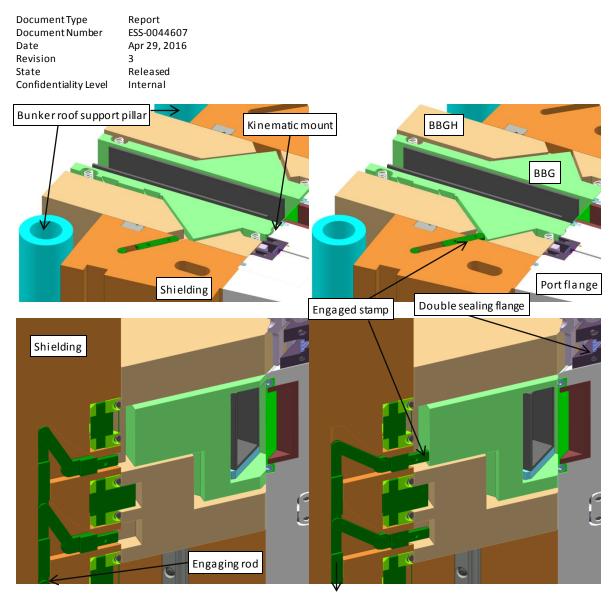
Horizontal cross-section (top pictures), upper moderator level, showing engaging the BBG by stamp linkage. Left: disengaged. Right: engaged. Notice the subtle, 5mm forward motion of the BBG. The lower pictures are a cross-section through the linkage (green)
